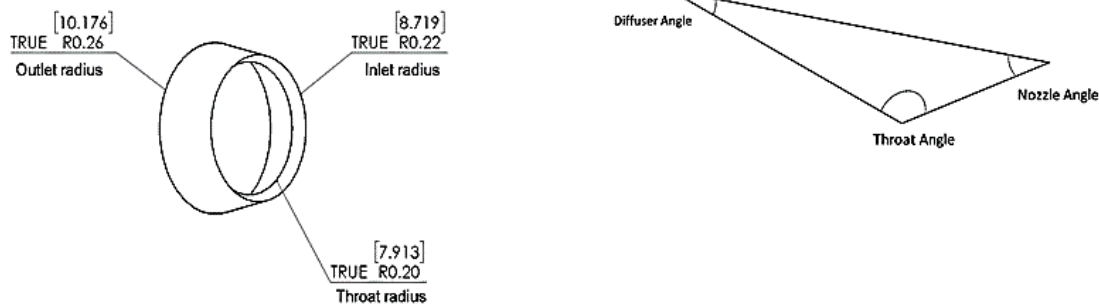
CAD drawing and the cut-section for the nozzle and diffuser shroud.
